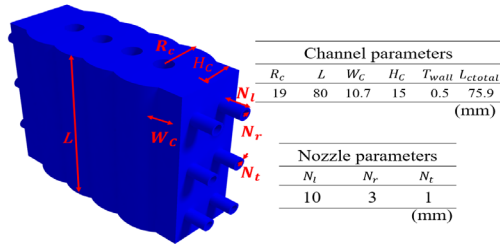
Dimension of the 3D printing cooling channel used in the experiment.
